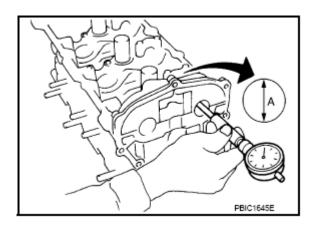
Measuring Inner Diameter Of VVEL Ladder Assembly (EXH Side) Using Bore Gauge Courtesy of NISSAN NORTH AMERICA, INC.
